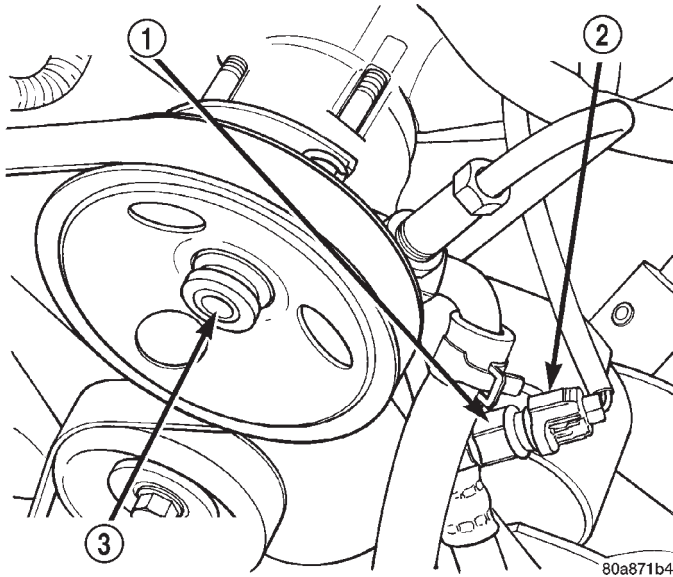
Power Steering Pump Pressure Switch—2.5L Engine
